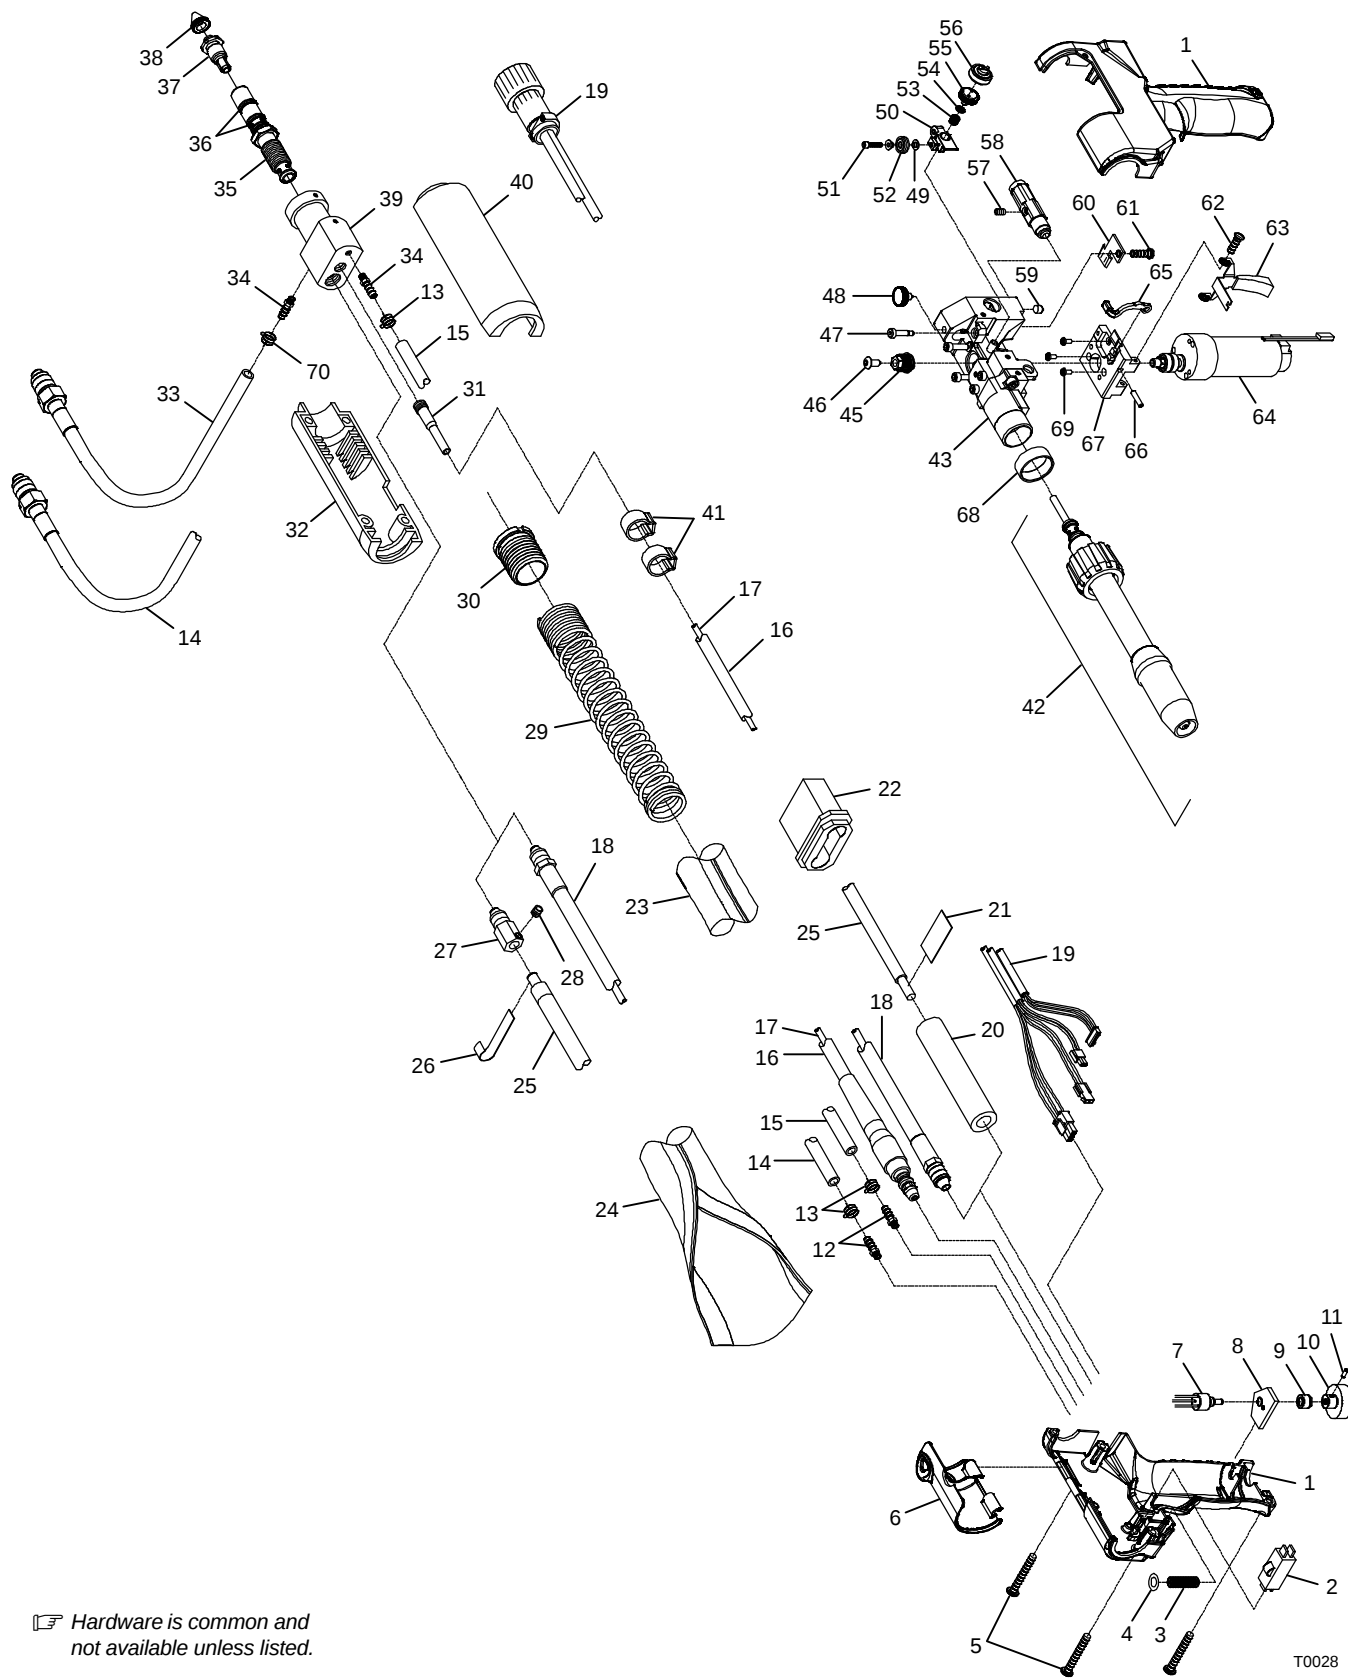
Exploded View Of XR - Pistol - Pro Gun
